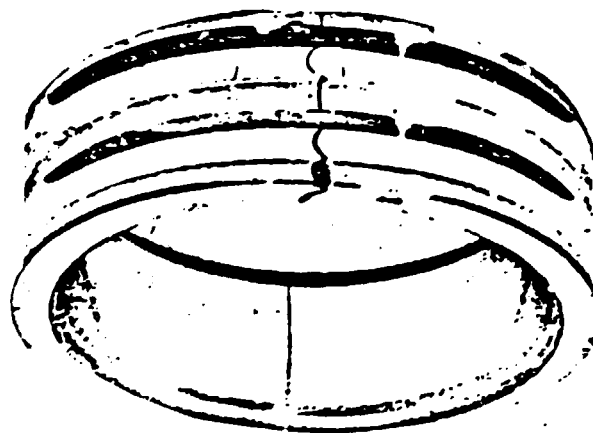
Cracked inner ring of the same self-aligning roller bearing. The ball impressions can be noticed here as well.
